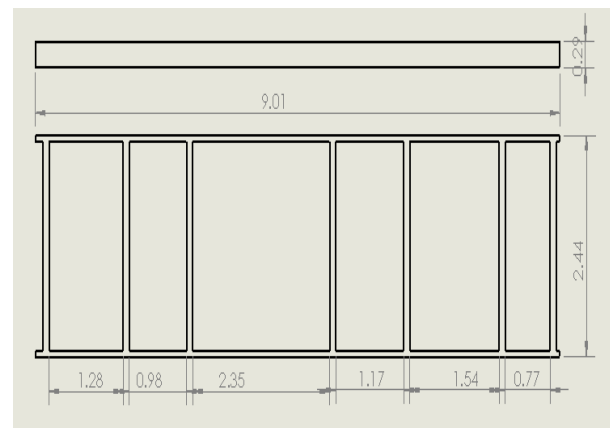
Geometry of chassis (Top view) (All dimensions are in m).
